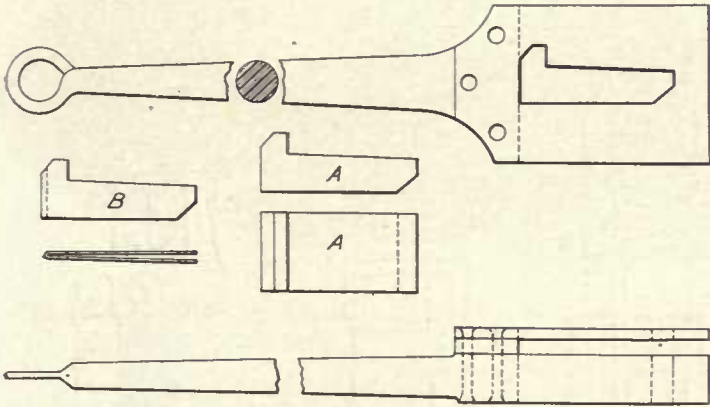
Device for Making Split Keys Under a Steam Hammer.
